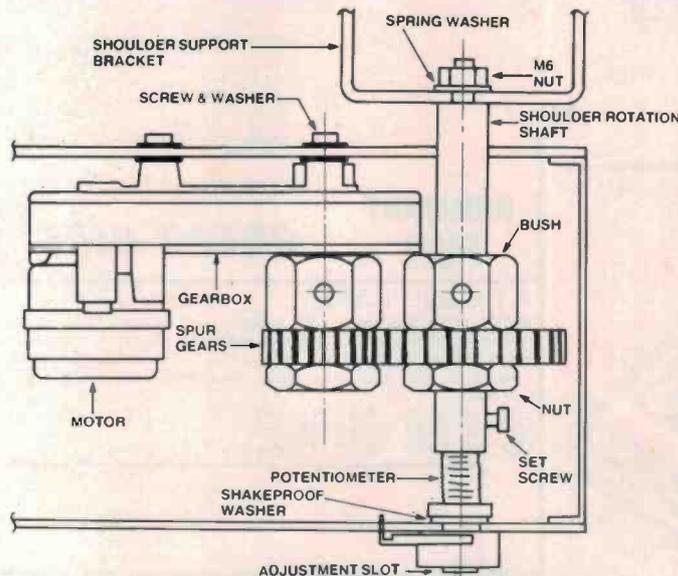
Rotation drive assembly. Install suppression capacitors C105A, C106A, as described later under the heading 'Wiring Looms', before mounting the motor.
